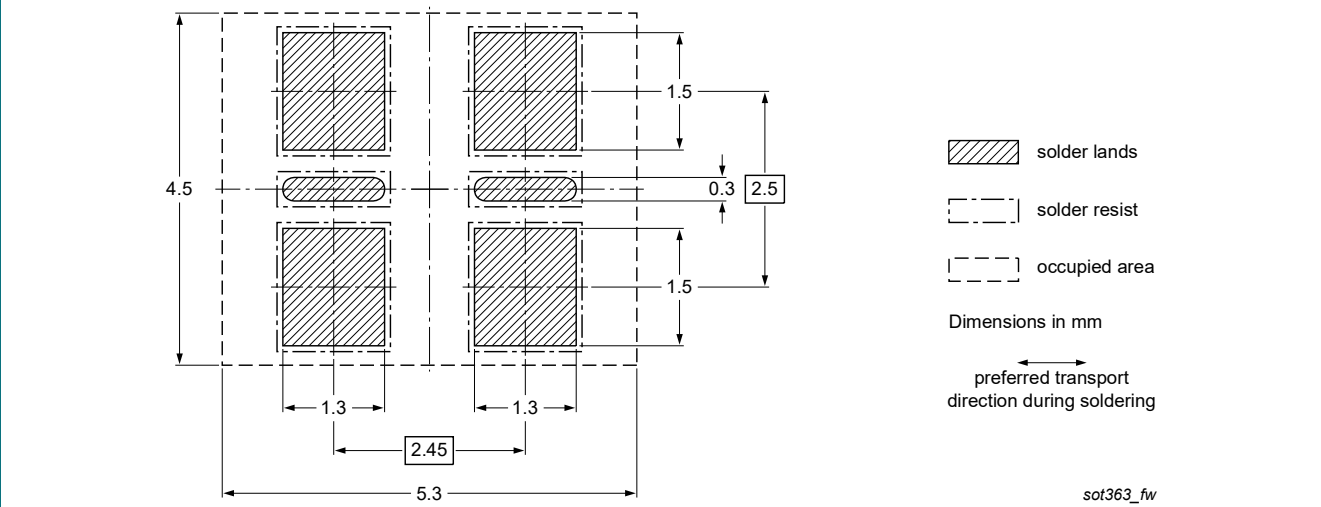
Wave soldering footprint for SOT363 (SC-88)
